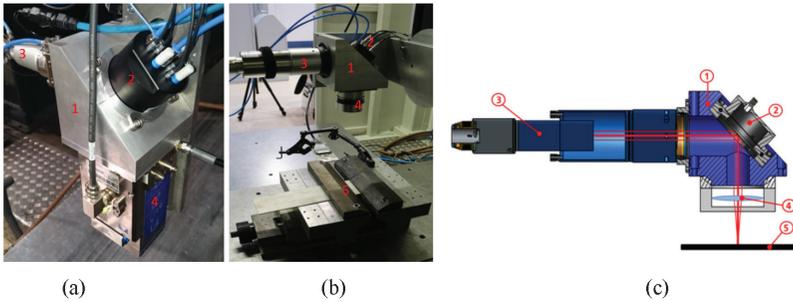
(a) Validation of the module within cutting and (b) welding, and (c) the configuration (1) beam deflection, (2) highly dynamic focus shifter module, (3) collimation, (4) focusing lens, (5) work-piece.
